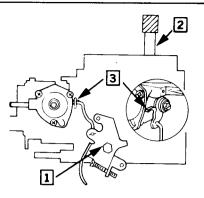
IDLE MIXTURE NEEDLE PLUG REMOVAL
